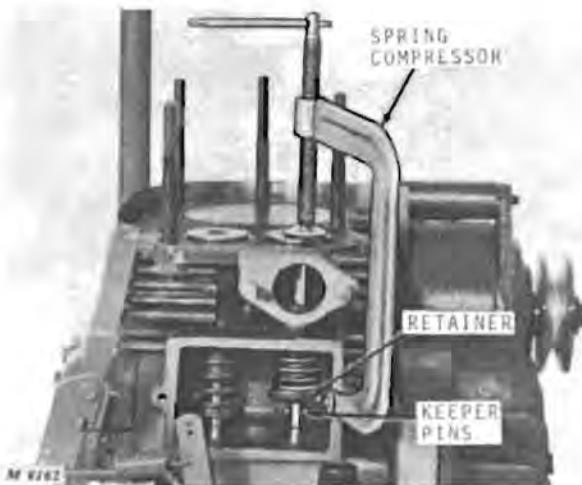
Installing Valve Springs, Retainers and Keeper Pins
